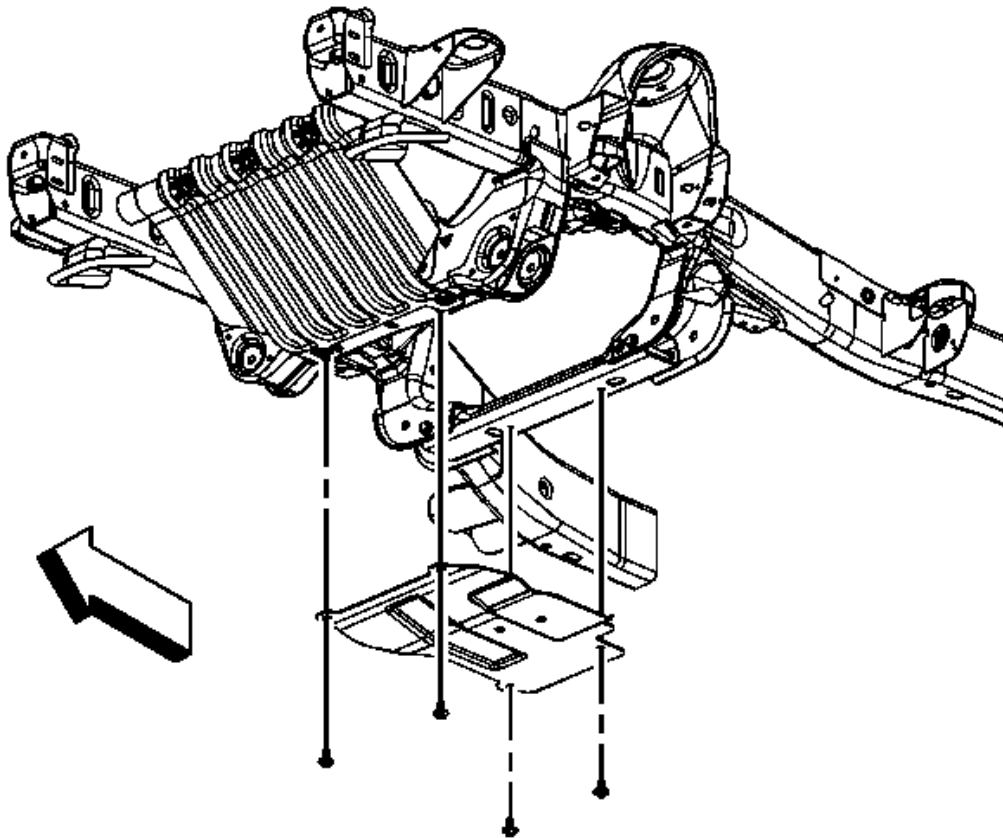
View Of Oil Pan Skid Plate & Bolts
